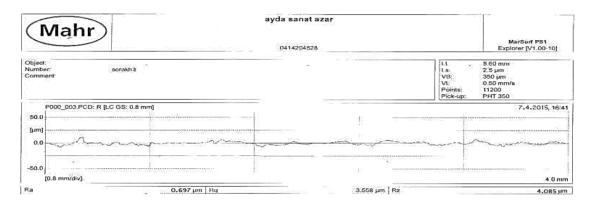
Surface roughness profile of the first hole (drilled with 0.06 (mm/rev) feed rate, 500 (rpm) spindle rotation speed, and cutting fluid containing $45 \,\mu m$ alumina particles).
